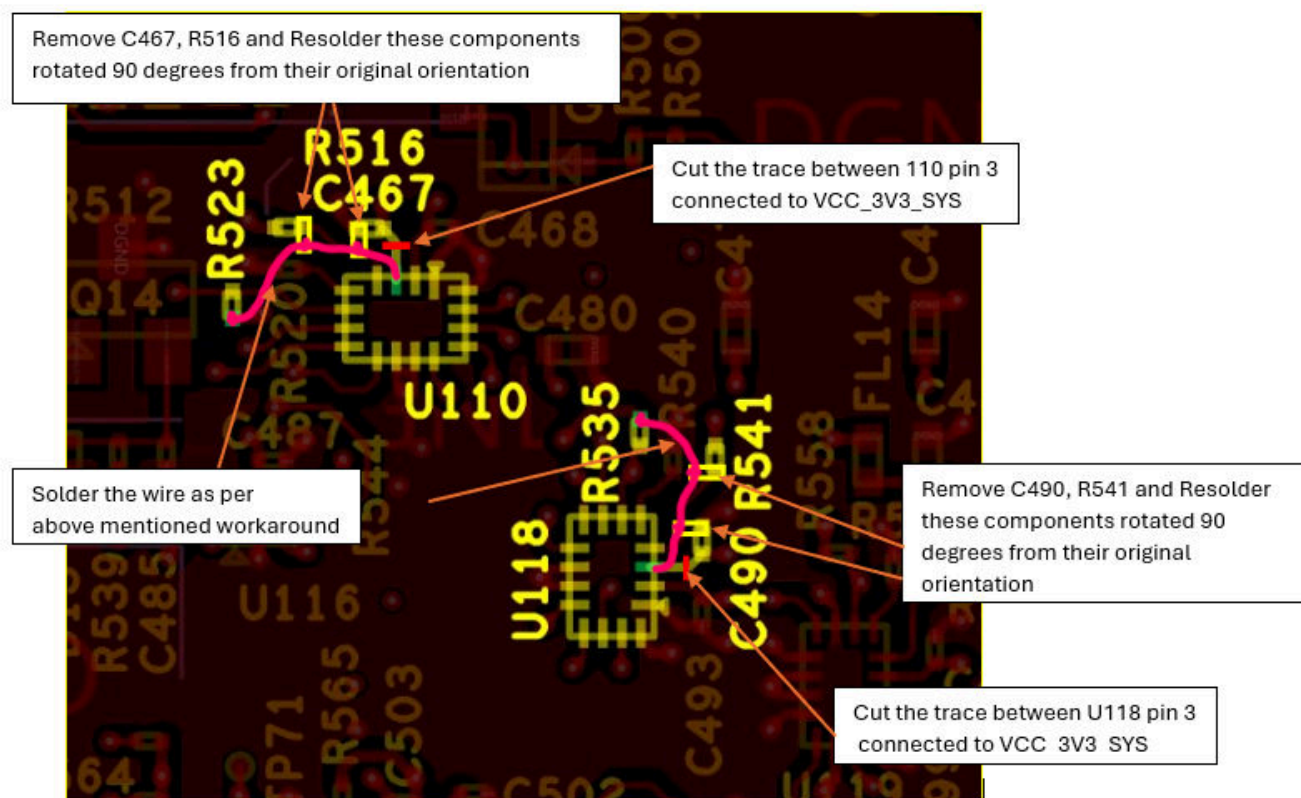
SK-AM62A-LP PCBA Bottom Side
